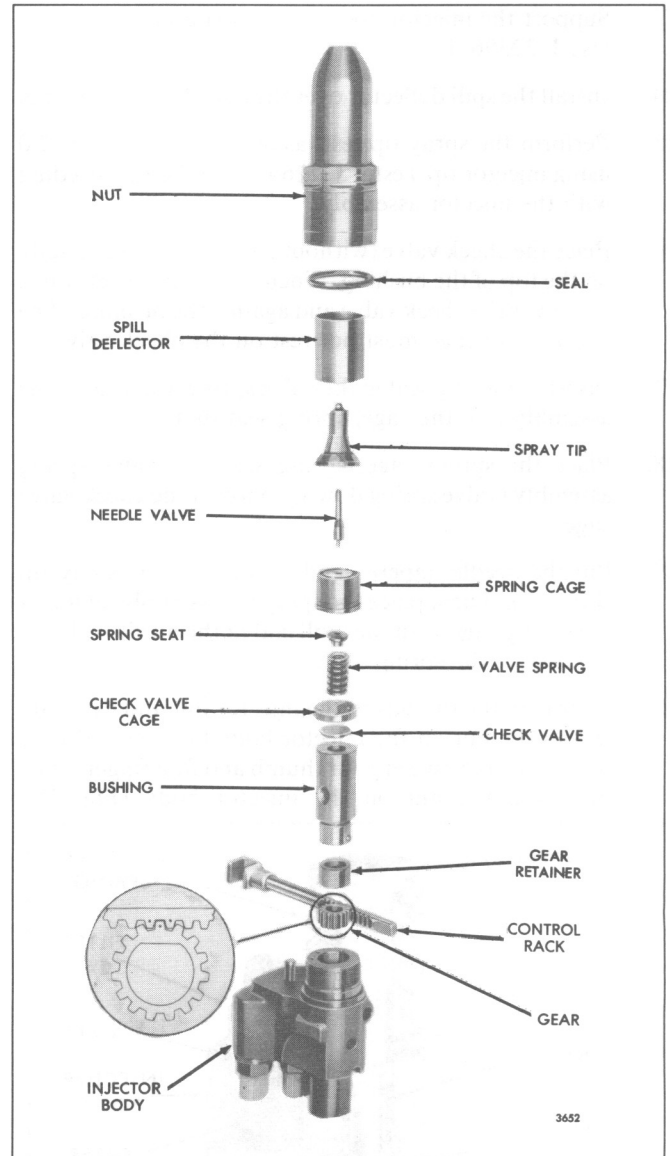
Injector Rack, Gear, Spray Tip and Valve Assembly Details and Relative Location of Parts
